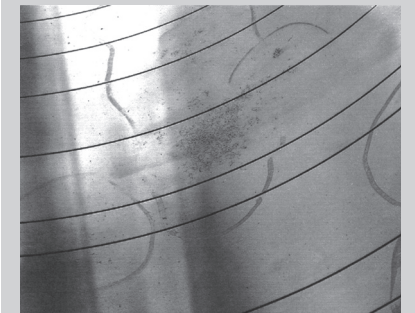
An example of shrinkage created by convection in an aluminum casting marked up by a foundry quality inspector.
